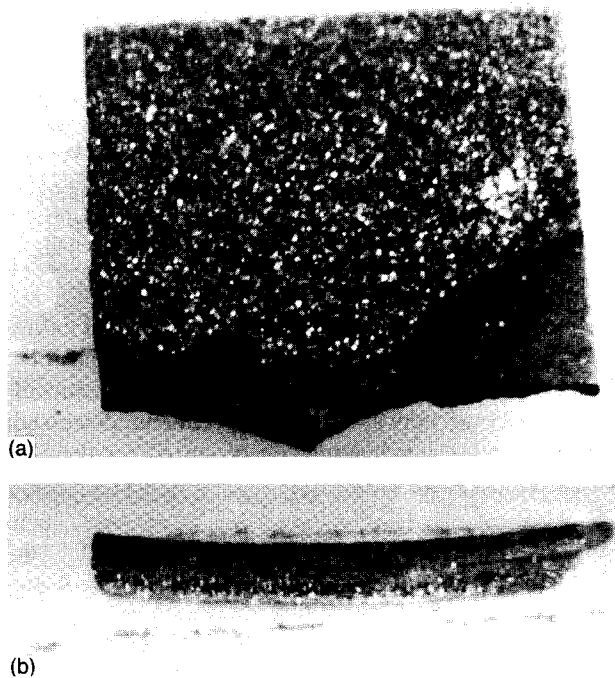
Fracture surface of Oconee-2 specimen M13DD.
